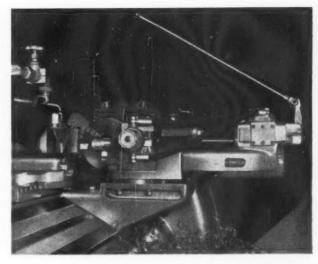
Close-up view from the rear of the Mannaioni high-speed threading lathe fitted with a facing and parting-off slide
